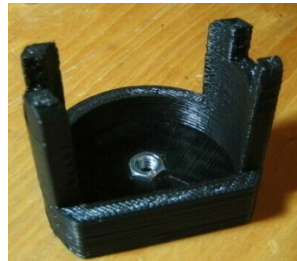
Sony PS3 Eye Webcam Mounting 3D Printed
